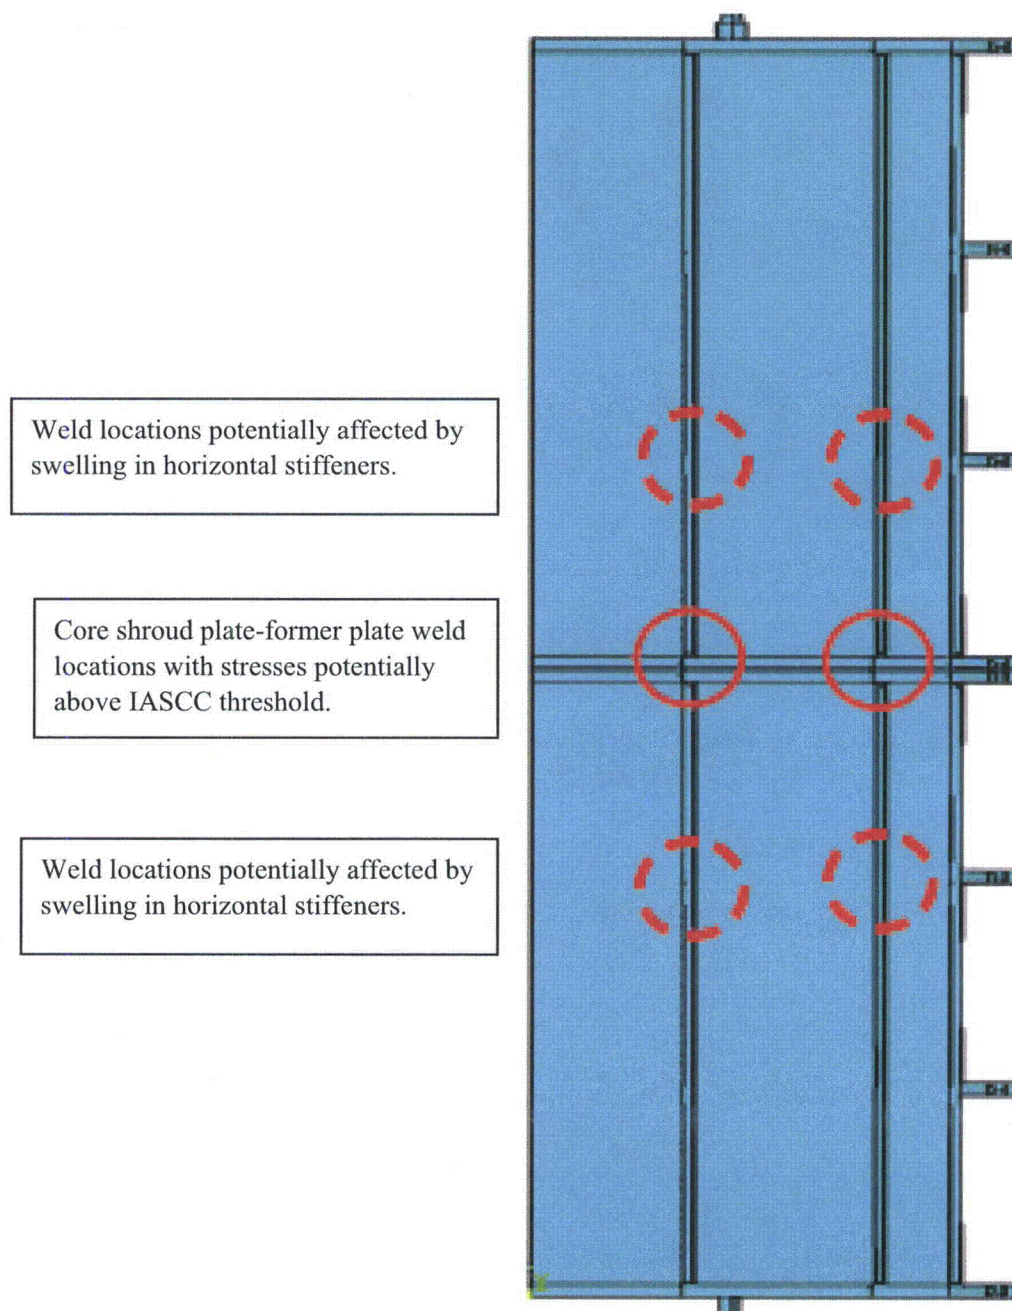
Potential Crack Locations for CE Welded Core Shroud Assembled in Stacked Sections
